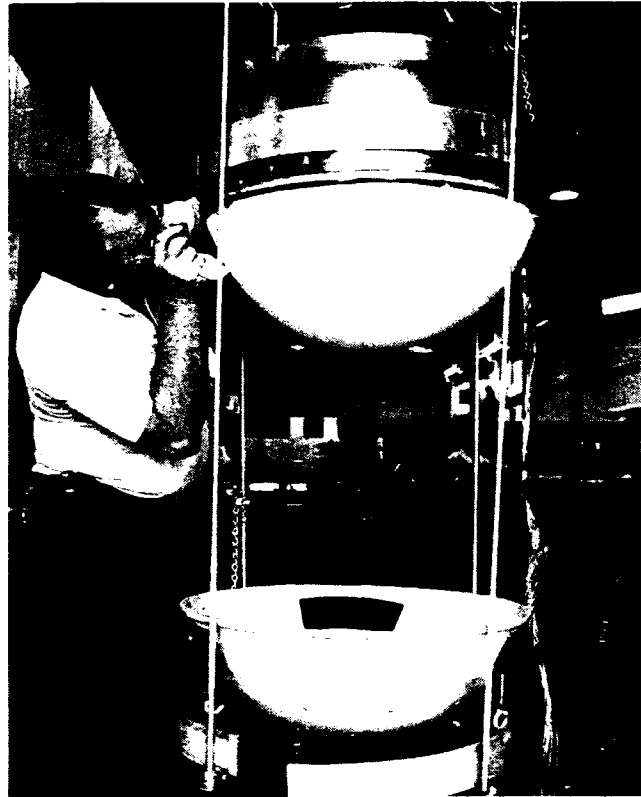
Periodic inspection of the aft head assembly during pressure cycling to 9,000-psi external pressure.
